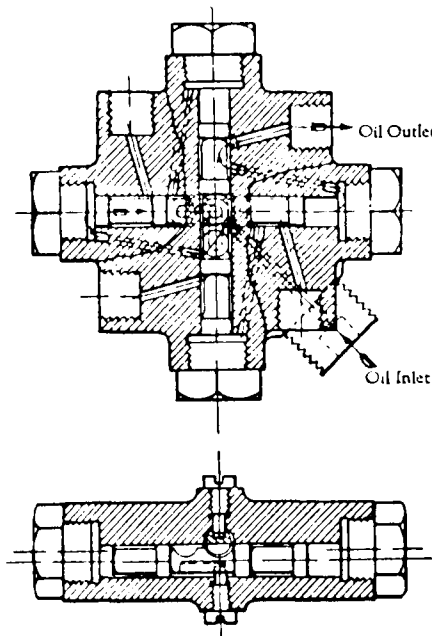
Sectional drawings of the Metcalfe Oil Divider.
